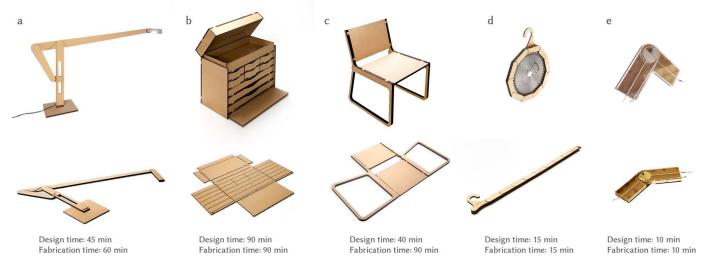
Photographs of example objects created using the LamiFold workflow. Above: after assembly. Below: as created by the LamiFold process. (a) A swing arm desk lamp. (b) A machinist's toolbox. (c) A chair. (d) A blade saver for circular saw blades.(e) A capacitive protractor
